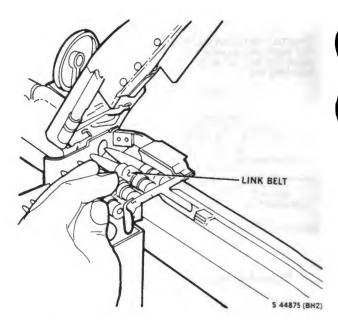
Positioning Cartridge Link Belt on Machinegun M60D
